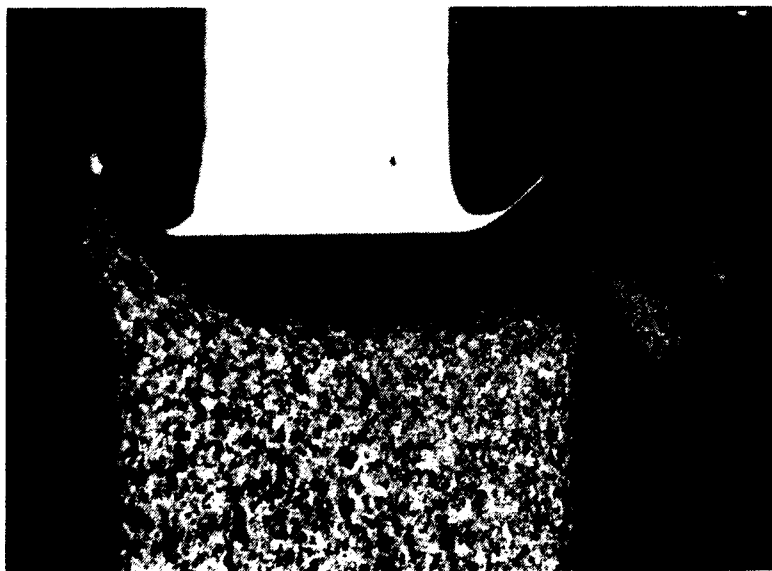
Inertia Welded CVD Re/Nb Tube After 25 Degree Bend Test
